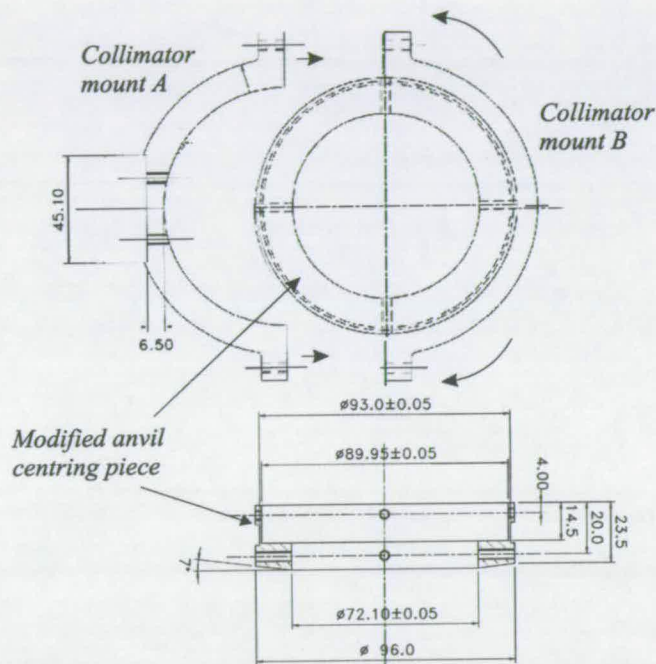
Technical drawing of the components comprising the collimator mount illustrating their assembly around a modified anvil centring piece. The positioning of these components on the anvil-seat assembly is shown in Figure 4.20 on the following page. The parts of the collimator mount A and B are attached to each other with Allen bolts where indicated and are free to rotate around the anvil centring piece
